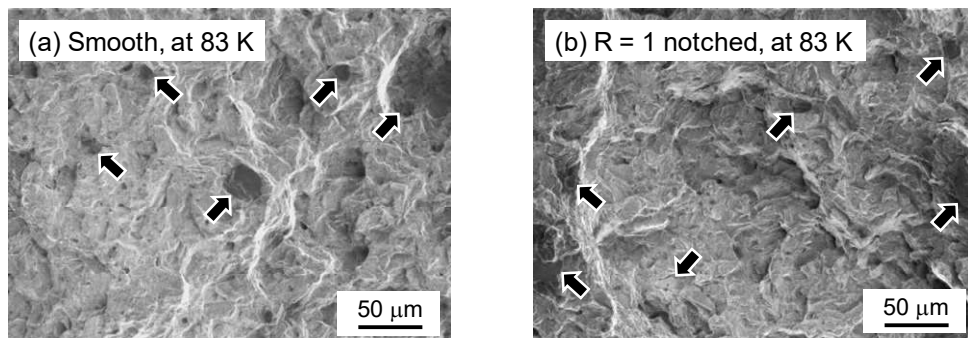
Tensile fracture surfaces of the (a) smooth specimen and (b) R = 1 notched specimen tested at 83 K.
